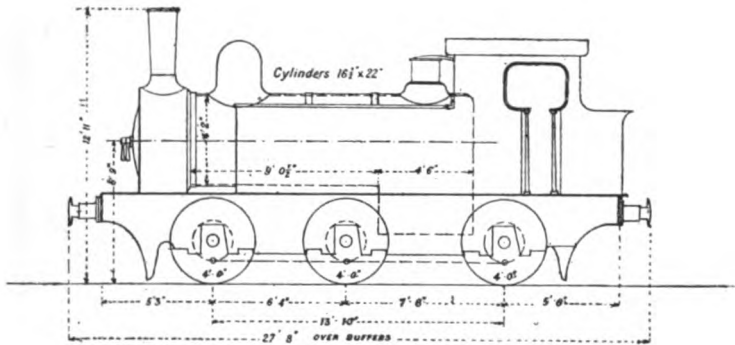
Great Eastern Railway Six Wheels Coupled Tank Engine.
